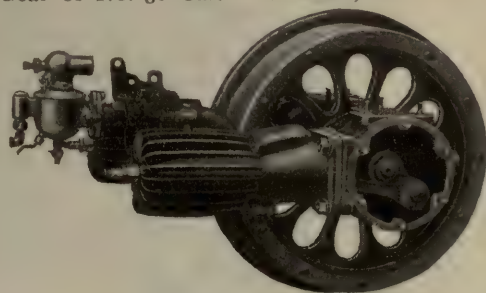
Showing the Crank Case of No. 28 Car. Fairbanks, Morse &amp; Co.
